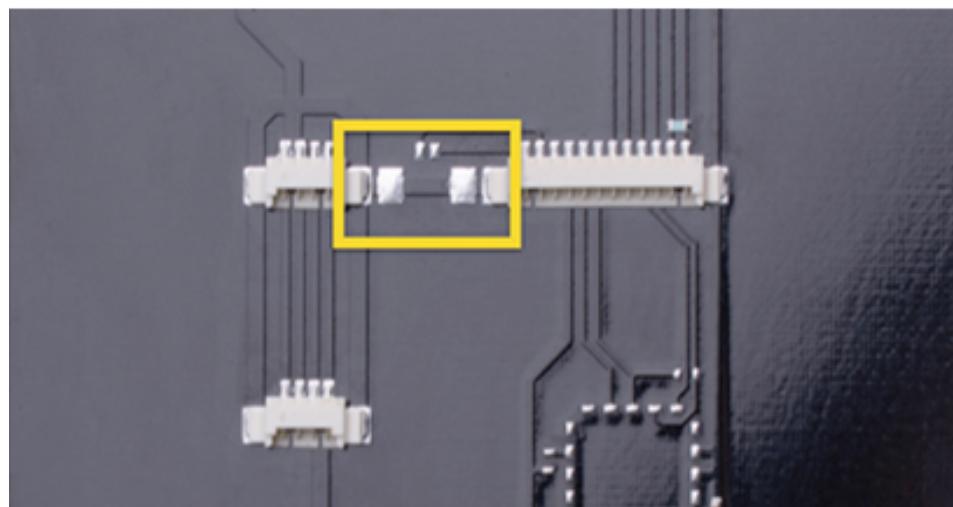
3U Solar Panels X/Y - bottom side - pads location for the external magnetorquer connector
